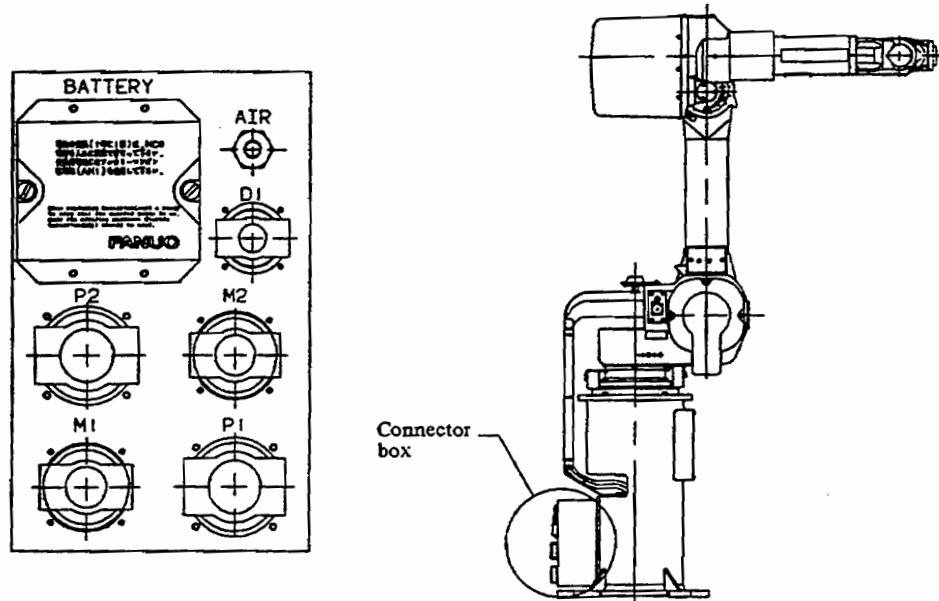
Connector box of robot mechanical unit (S-10)
